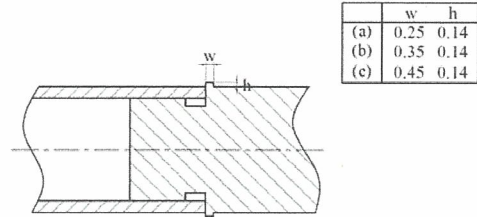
Joint geometry for bottom end cap welding.
